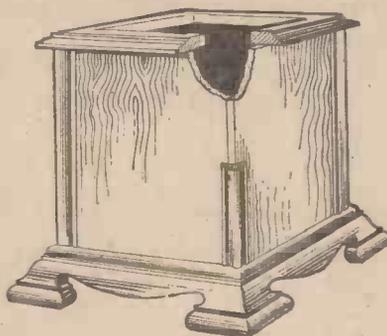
Showing the general construction and a detail of the way the corner joint is covered by moulding.
